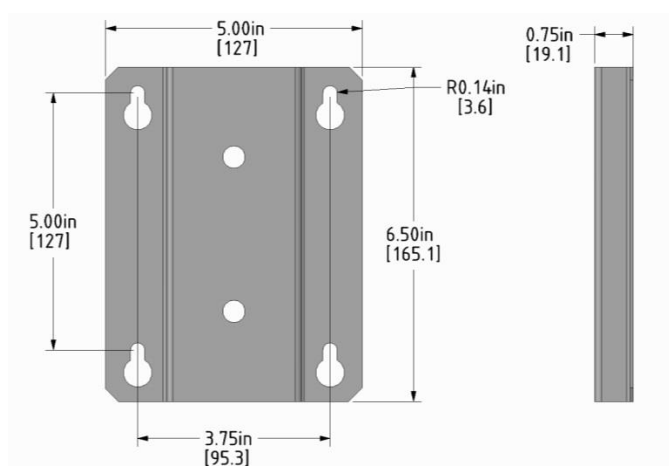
Dimensions of the 9165 sensor mounting bracket.
